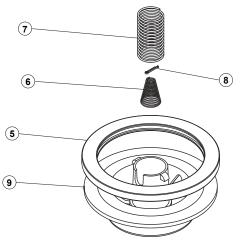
Enardo ES-665 Series Center and Pressure Gasket
